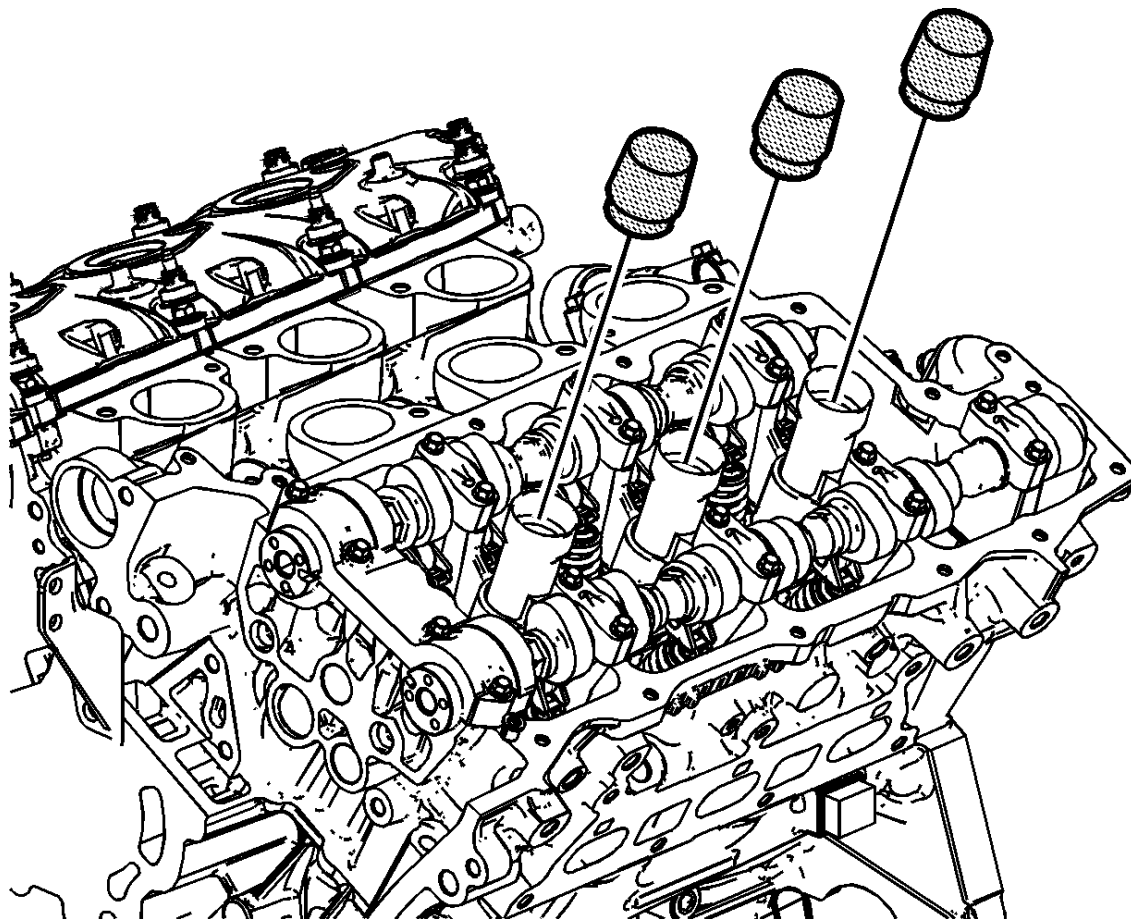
View Of Spark Plug Tubes & Left Cylinder Head
